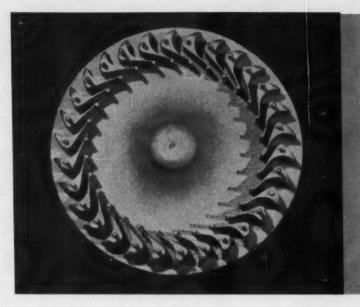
(Left) Turbine wheel forged from SAE 4130 steel. This part has a hub with a coarse thread on the opposite side.
